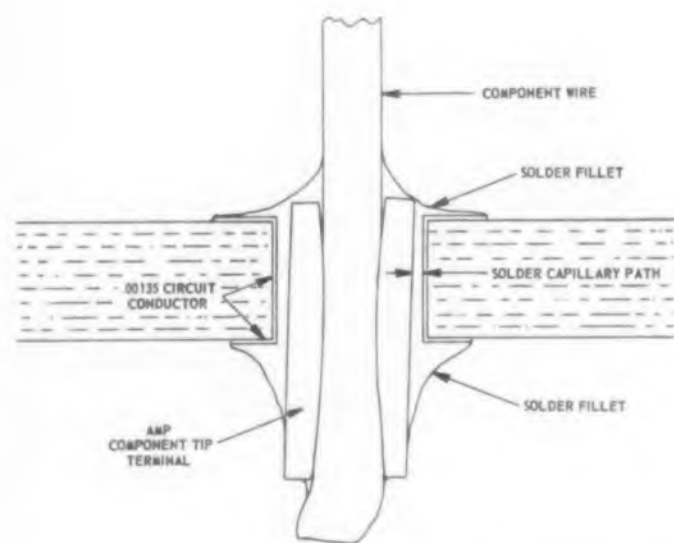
(above) Made by Amp Inc., these component tips provide a way of attaching component parts to printed boards that have neither plated through nor eyelet connections.
